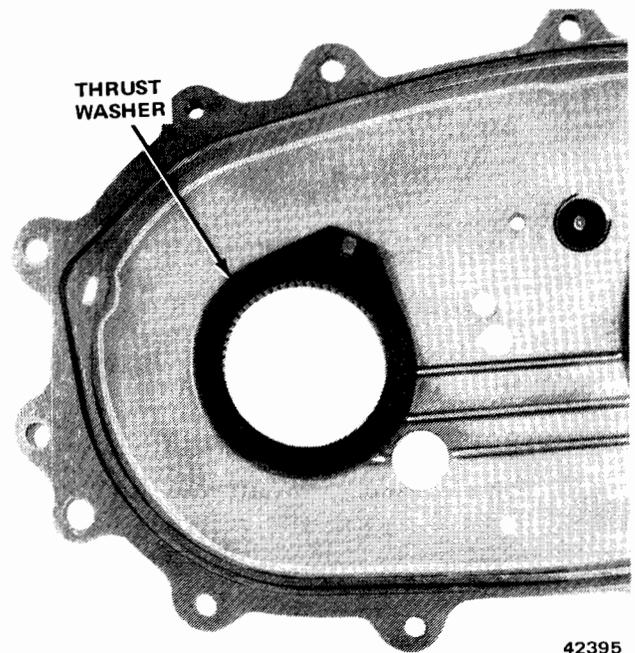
Drive Sprocket Thrust Washer in Position on Case Cover
